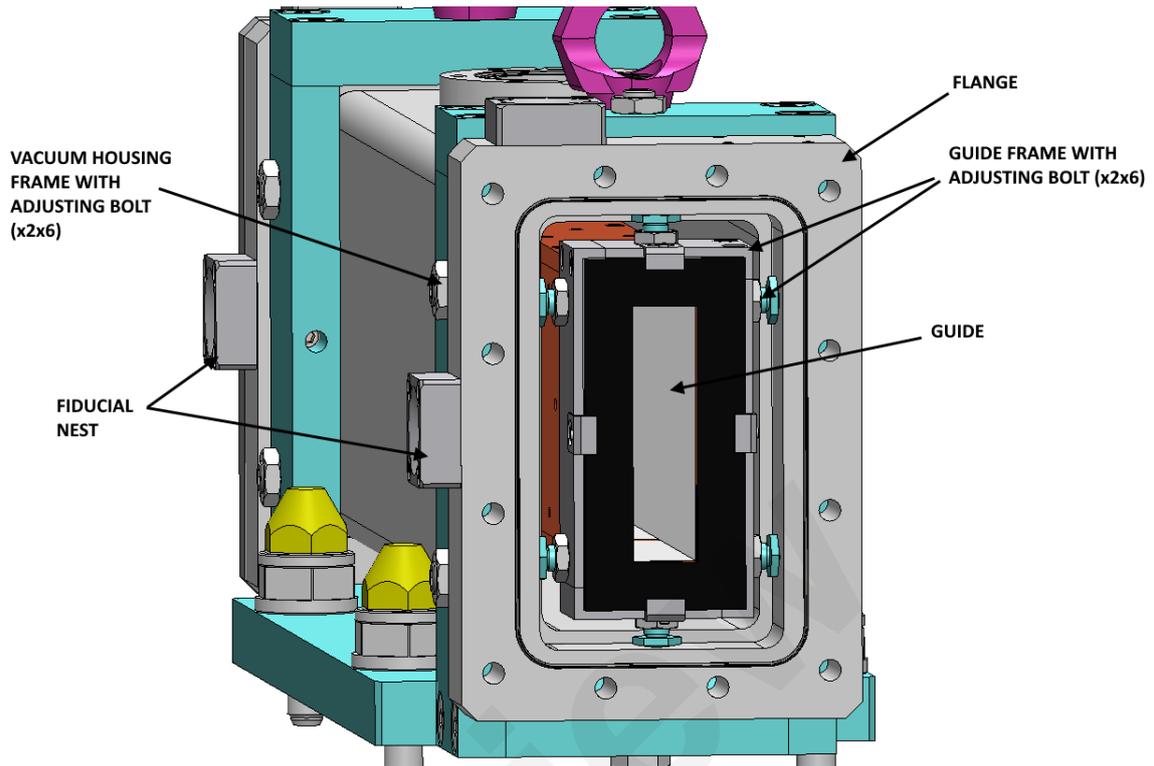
Detail of the neutron guide inside of the vacuum housing with the Al-window removed. The vacuum housing's adjusting bolts, which align the vacuum housing laterally and vertically through the adjusting frame.
